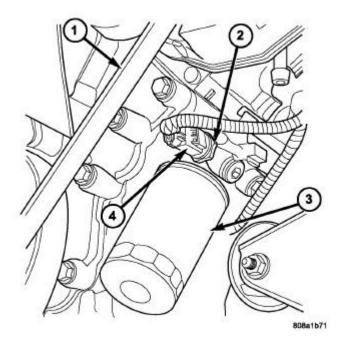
Locating Belt, Oil Pressure Sending Unit, Connector & Oil Filter Courtesy of CHRYSLER LLC
